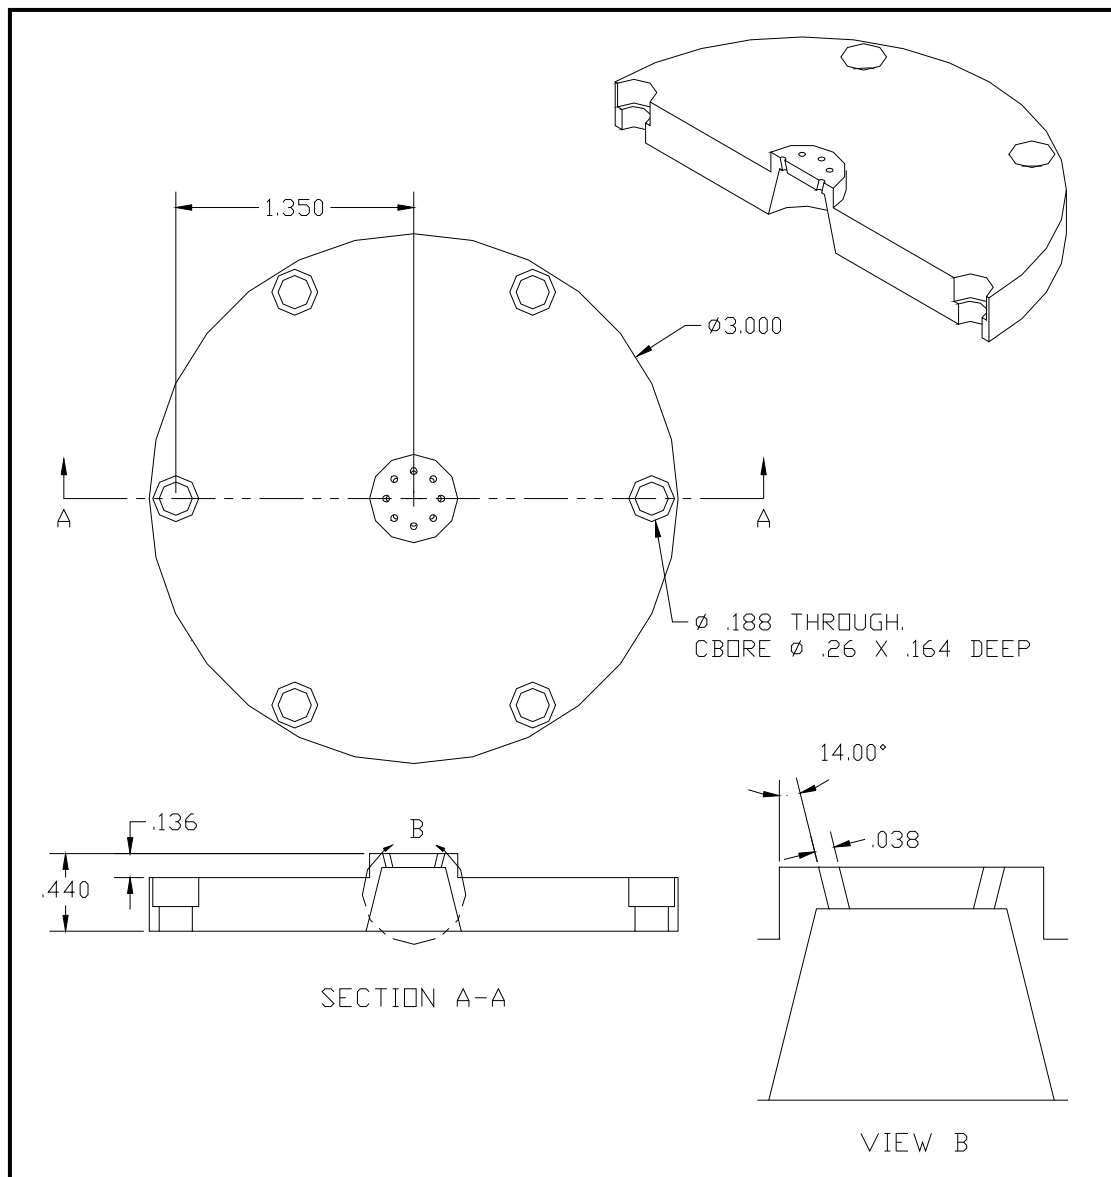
CAD Drawing of the 8-Hole, 0.965 mm, Straight Channel, Diverging Jets Nozzle Block used for the 2nd Generation Injector (Filename: secondgendiv.dwg).
